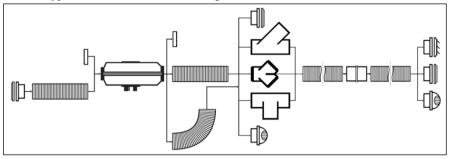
Air duct connections for AIR-2D (60 mm)
